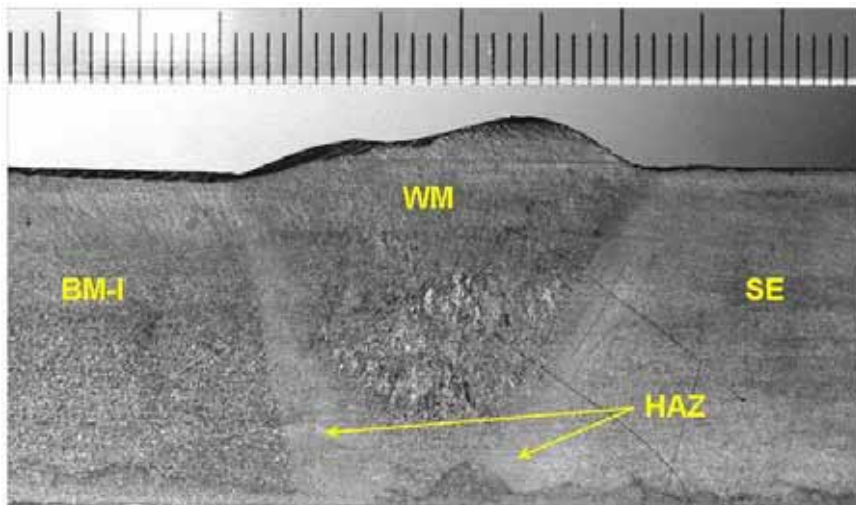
Section of the welded P91 pipe showing SP test piece locations.
